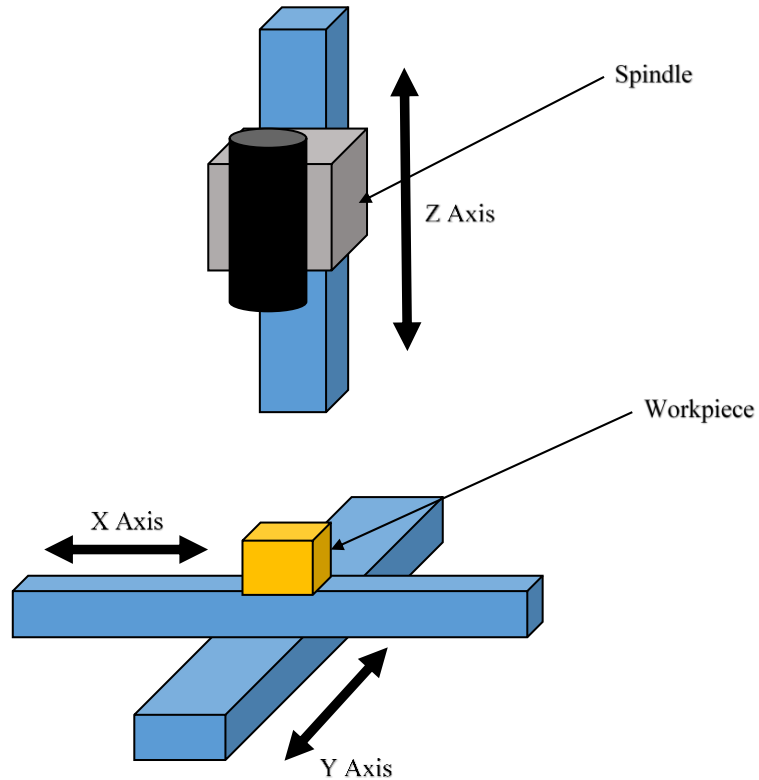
Standard Cartesian kinematic arrangement for the micromilling machine
